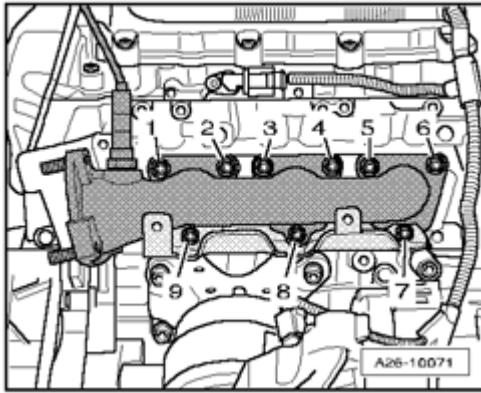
Removing Nuts, Bracket For Heat Shield & Exhaust Manifold
